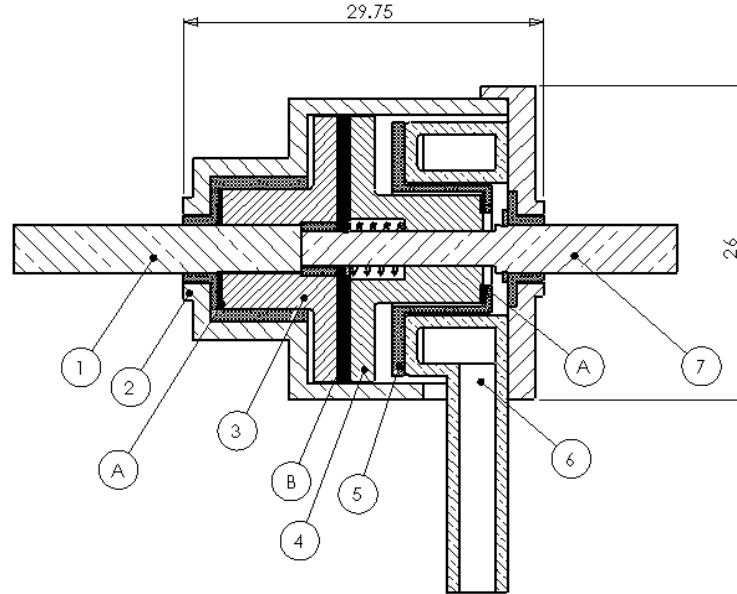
Cross-sectional drawing of miniature pneumatic clutch showing 1) Input shaft; 2) Casing; 3) Input Friction Plate; 4) Output Friction Plate; 5) Load Transfer Plate; 6) Pneumatic Actuator; 7) Output Shaft. The parasitic friction contacts (A) and contact between the friction plates (B) are shown. Dimensions are in mm.
